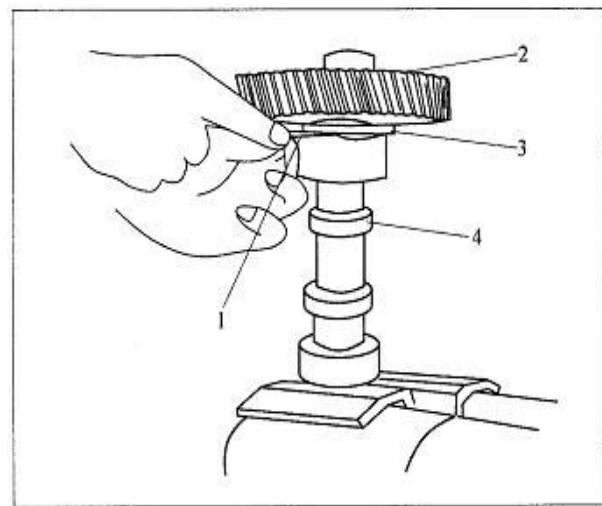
Measurement of the Thrust Clearance of Camshaft
